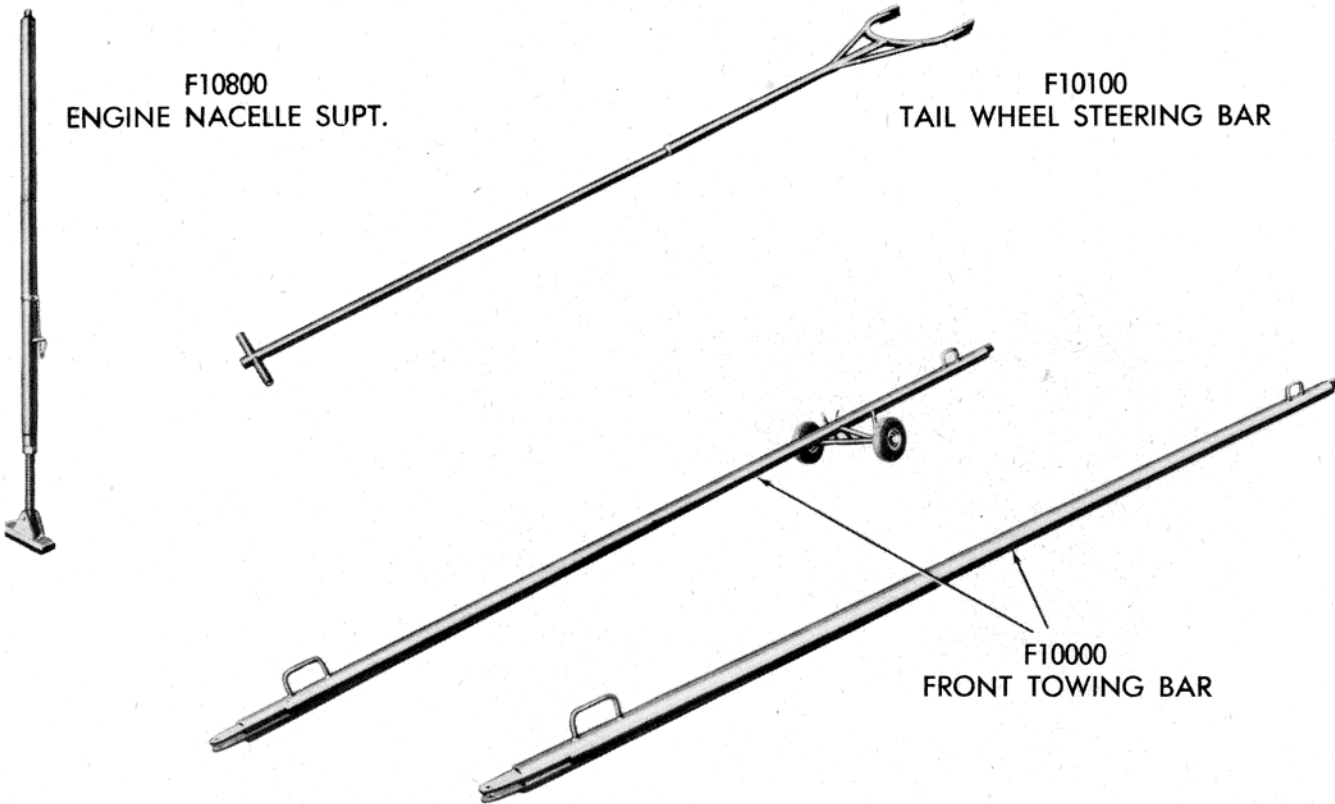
Ground Handling Equipment (Sheet 1 of 3)
